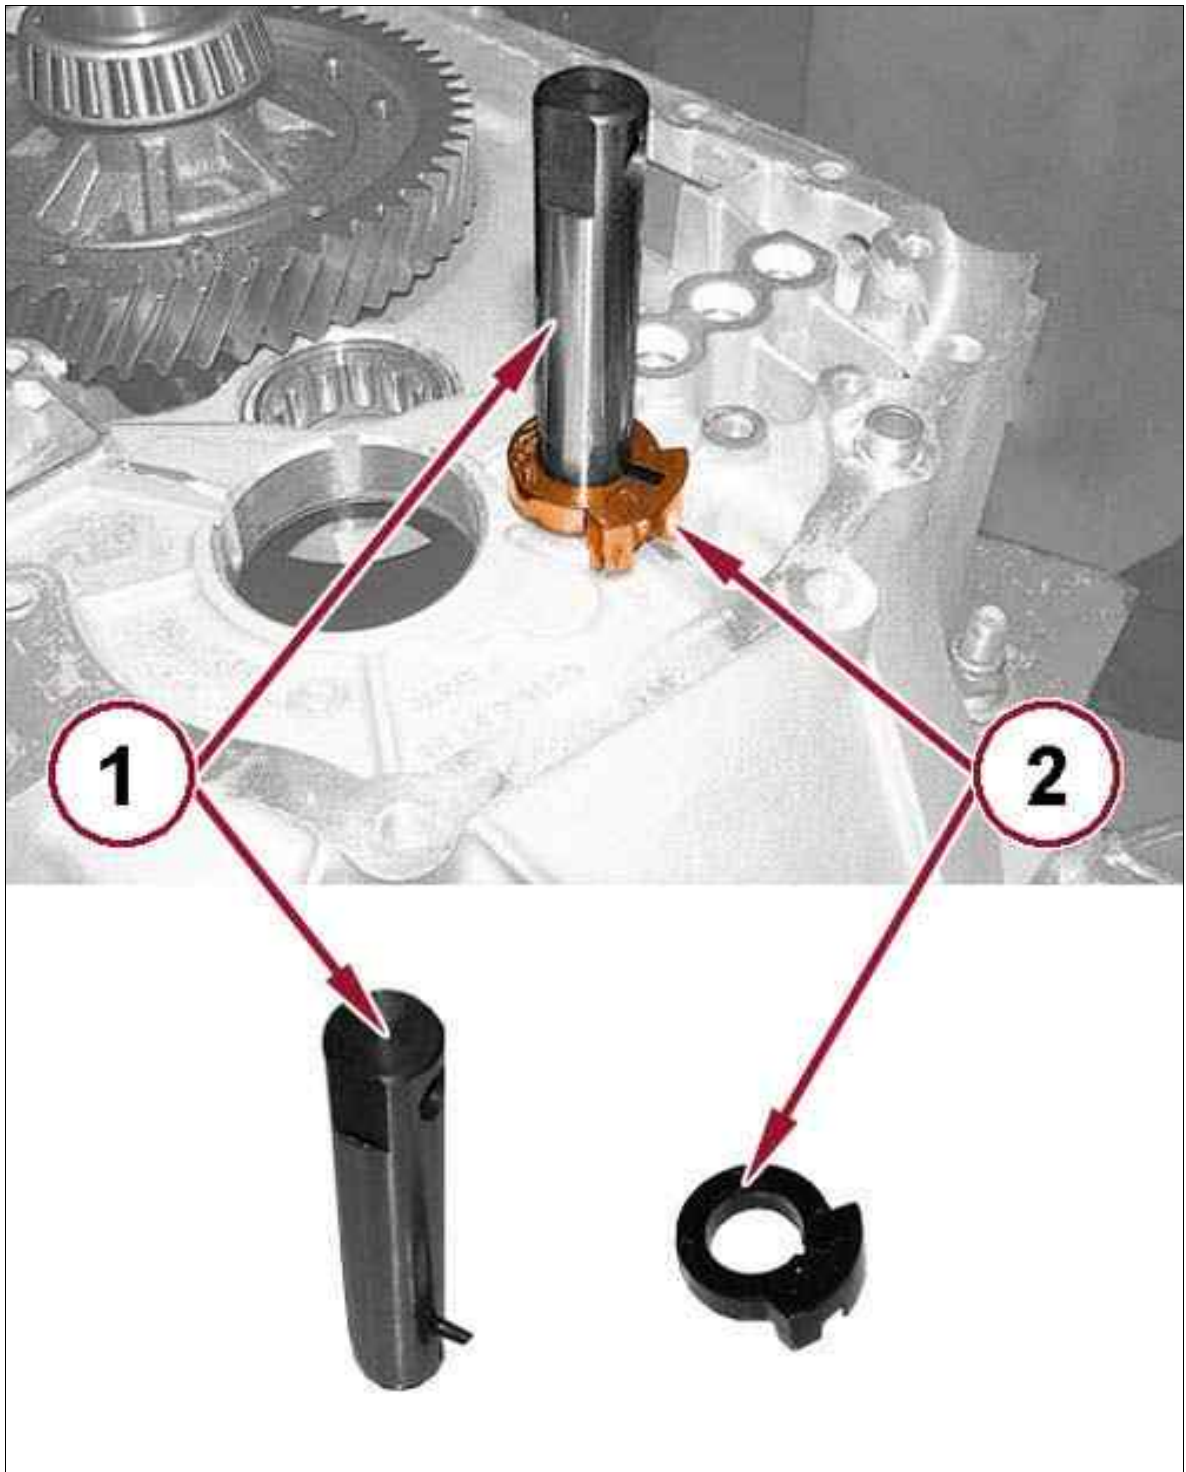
Reverse Idler Gear Shaft Support Screw & Reverse Idler Gear
